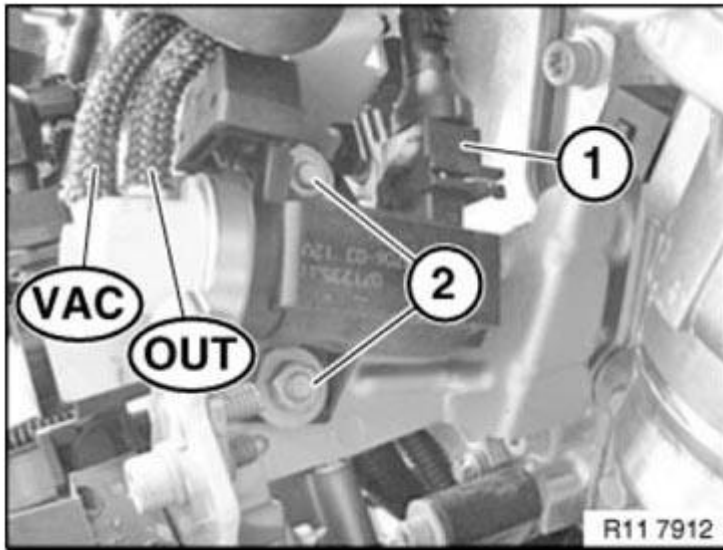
Identifying Black/Blue Vacuum Hose Connection With Plug Connection
